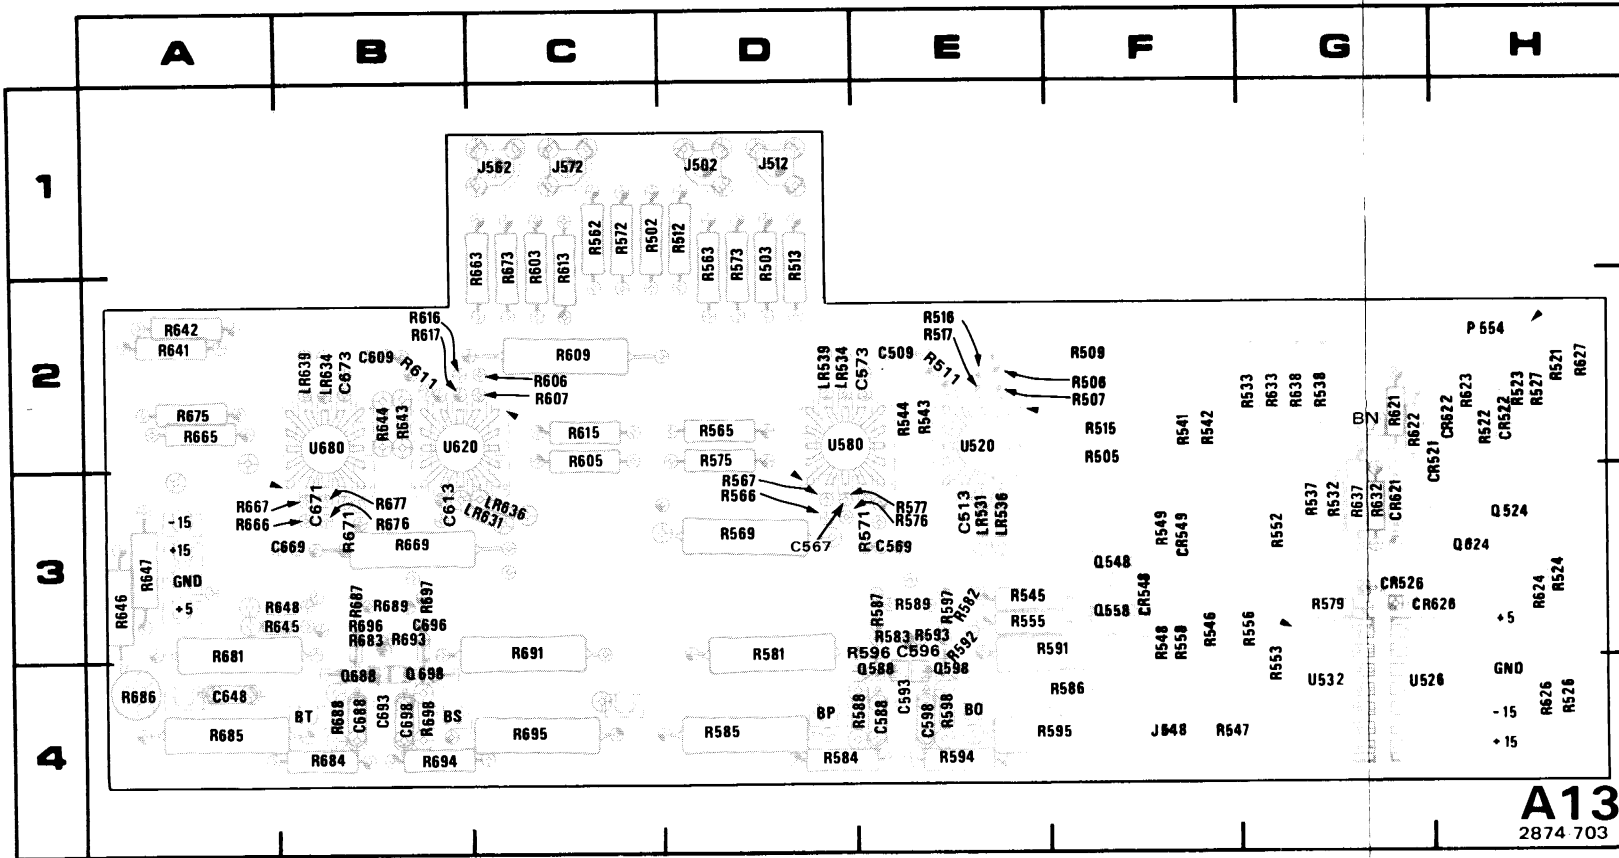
A13—Trigger Amplifier circuit board assembly.
